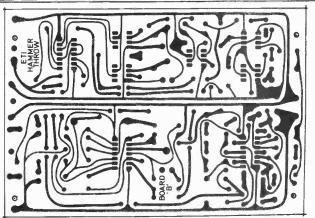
Full size foil pattern of main control board (160 x 110 mm)
